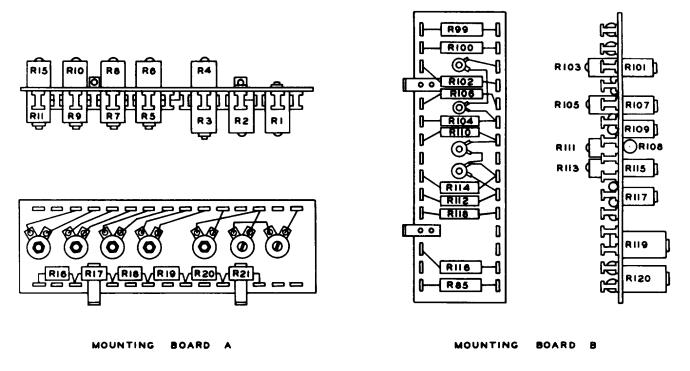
Meter Test Set TS-682A/GSM-1, resistor mounting boards.
